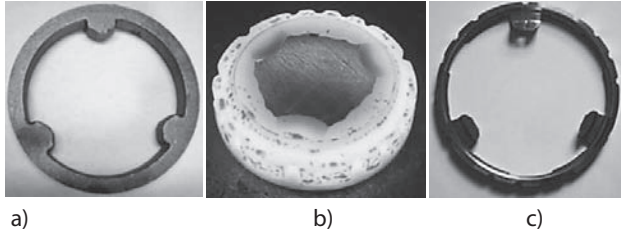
Synchronizer ring 9 051 276: a) blank, b) forging, c) “ready made”
